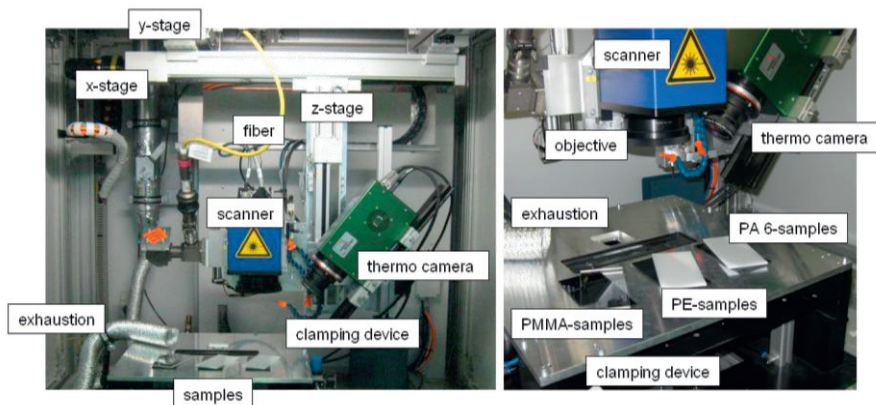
Image of the experimental setup chosen for the welding experiments
